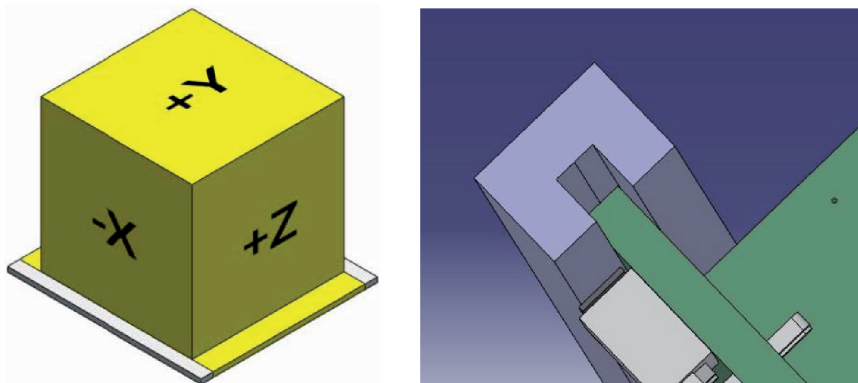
Focus on the Sliding Backplate for PocketQube Ejection [11].
